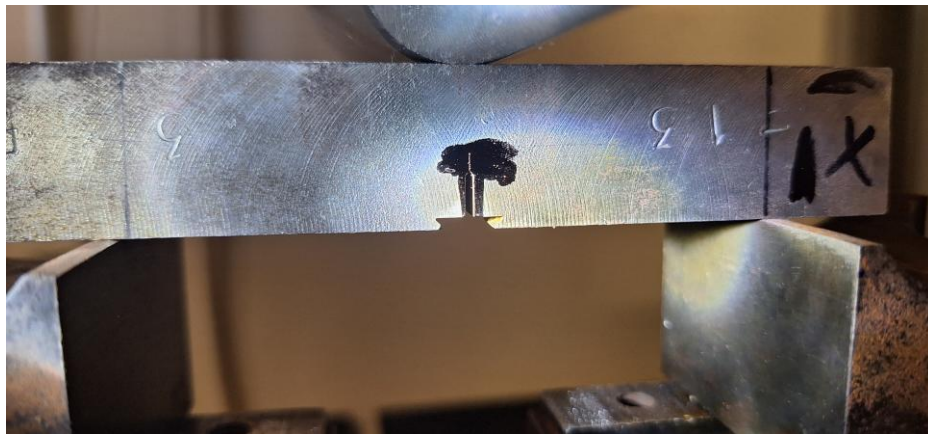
Fatigue pre-cracking of the SENB specimen. The light highlights the growing fatigue crack, making it sparkle.
